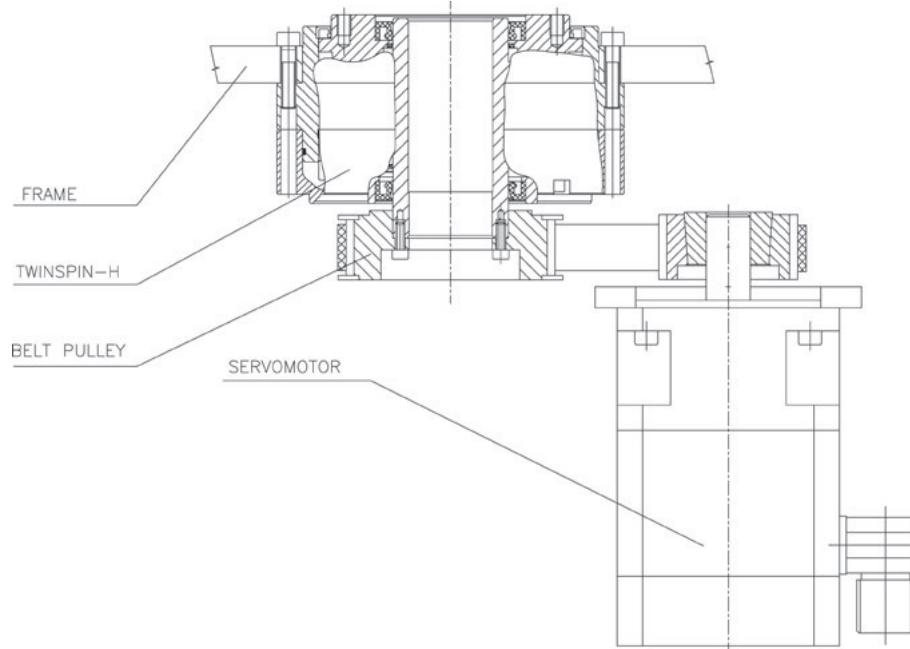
Connection of a toothed pulley with the reduction gear shaft by means of a screw connection
